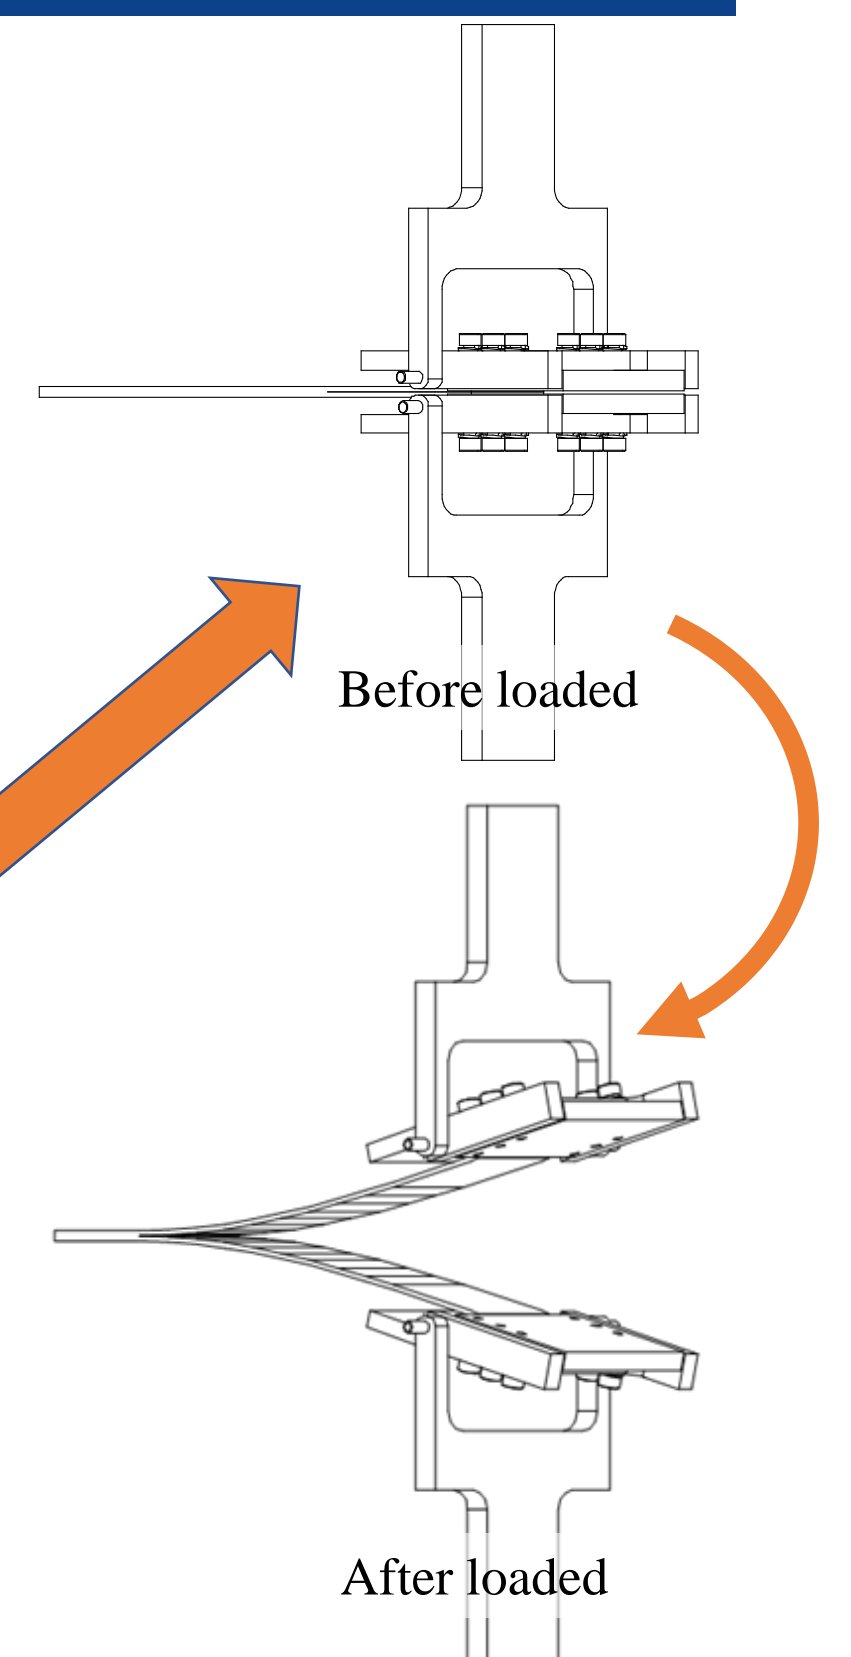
Typical DCB specimen with JAXA-Non-adhesive inserting DCB test fixture before/after loaded
